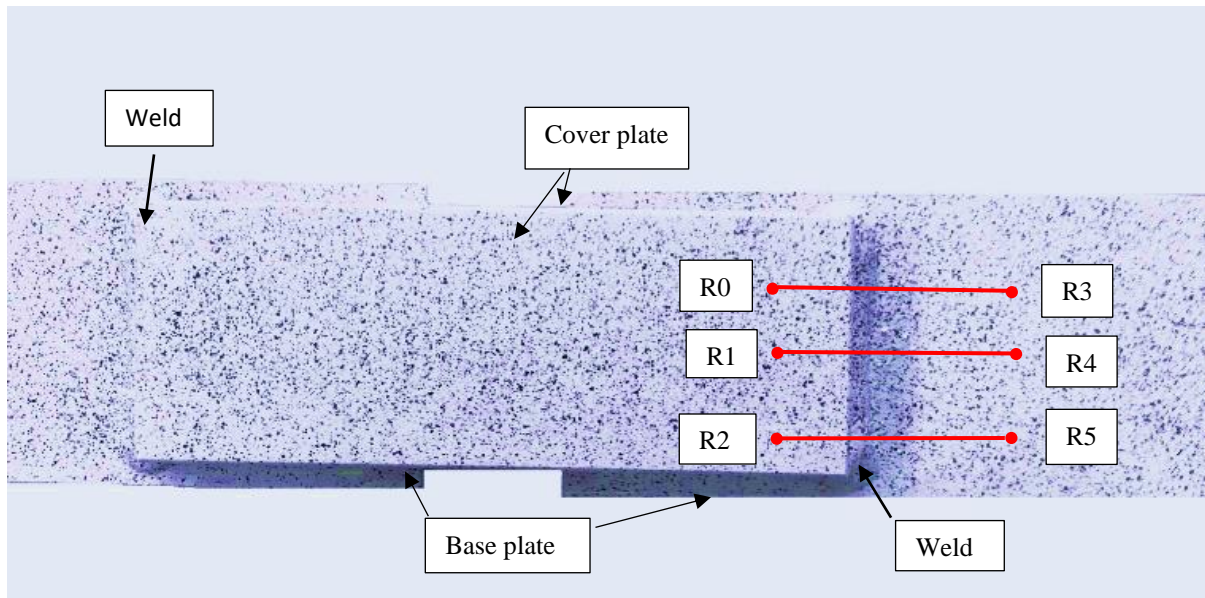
The location of the measurement points on the transverse fillet lap-welded specimen at the initial state.
